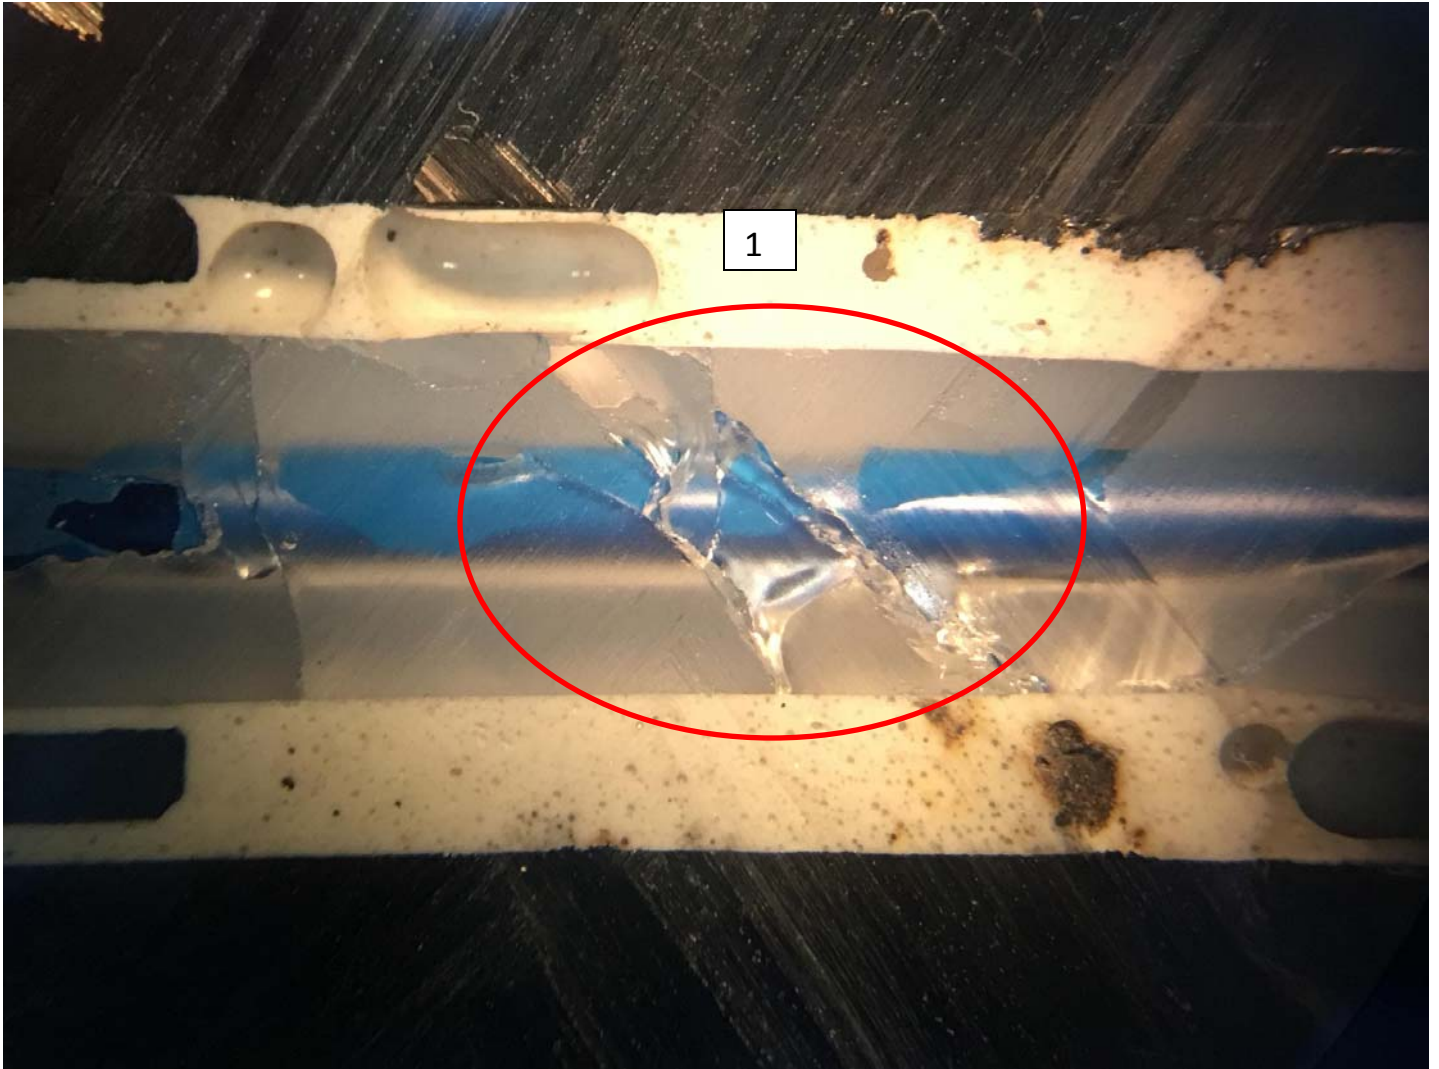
One of penetrators was cut off the assembly and sectioned longitudinally, resulting in 2 pieces: Side A which is thicker and contains larger piece of glass tube and optical fibers; and Side B which is thinner with smaller piece of glass tube, and no optical fibers.
